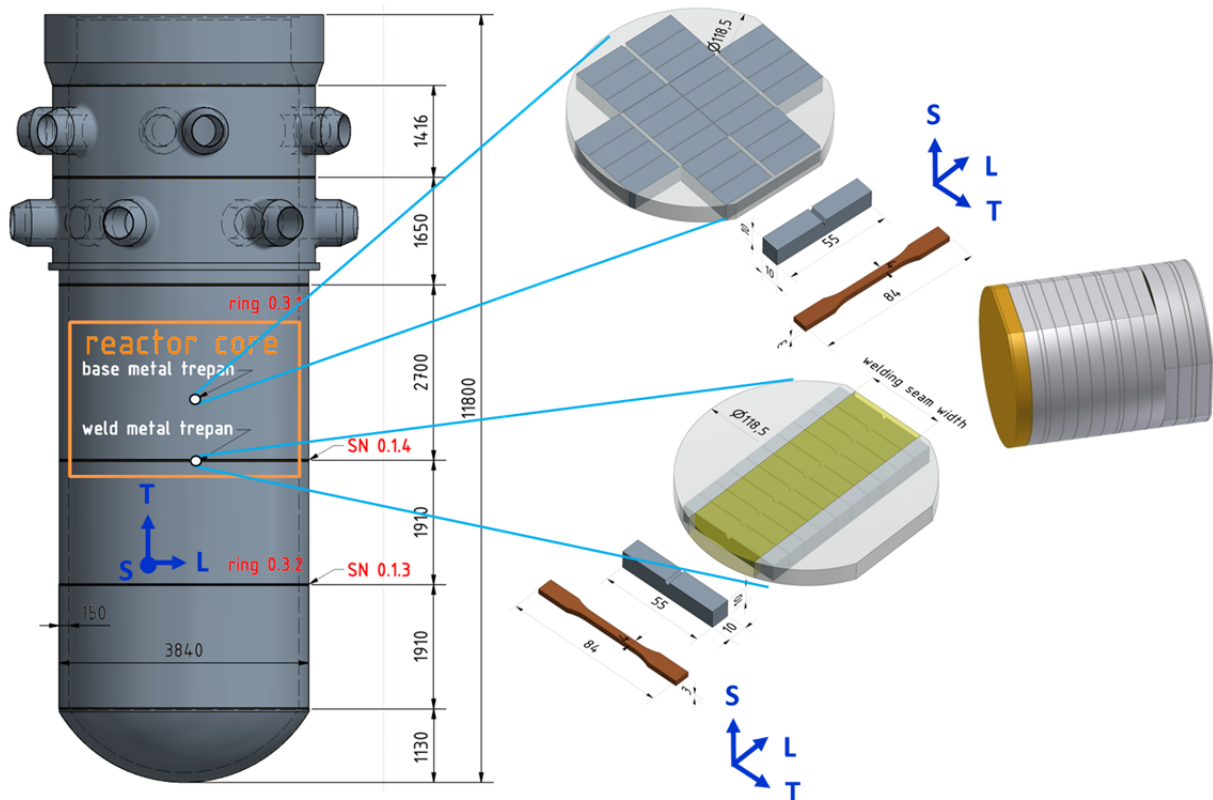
Location and exemplary cutting scheme of the trepan from the forged base metal ring 0.3.1. and the multilayer welding seam SN0.1.4.
